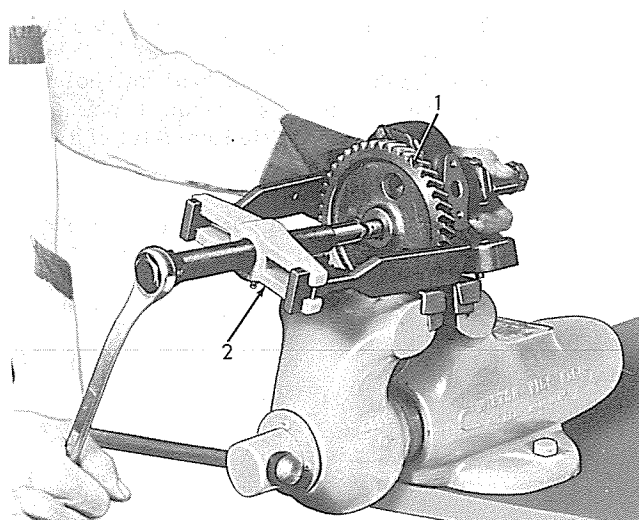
Removing Lubricating Oil Pump Driving Gear
